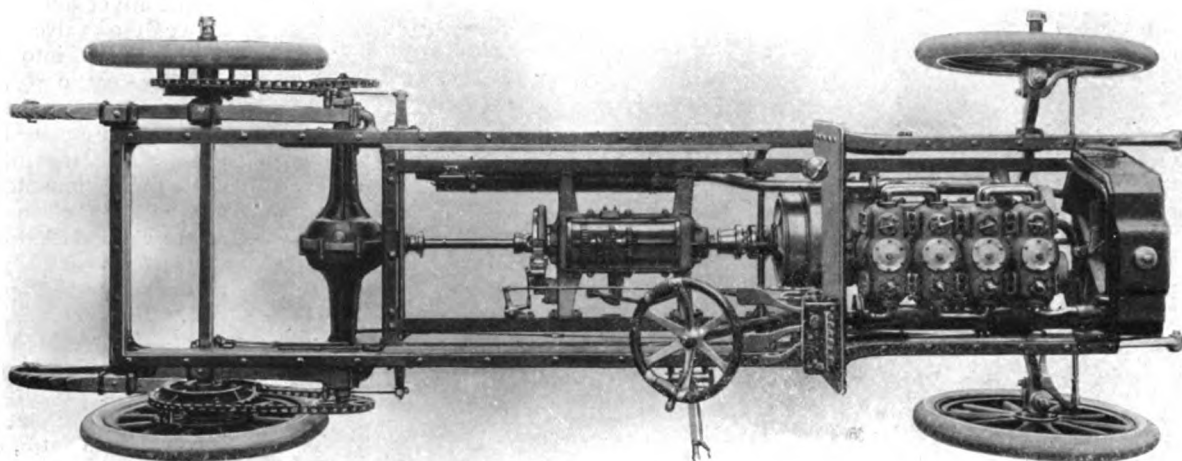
View from above of a 4-cylinder Gladiator Chassis.
